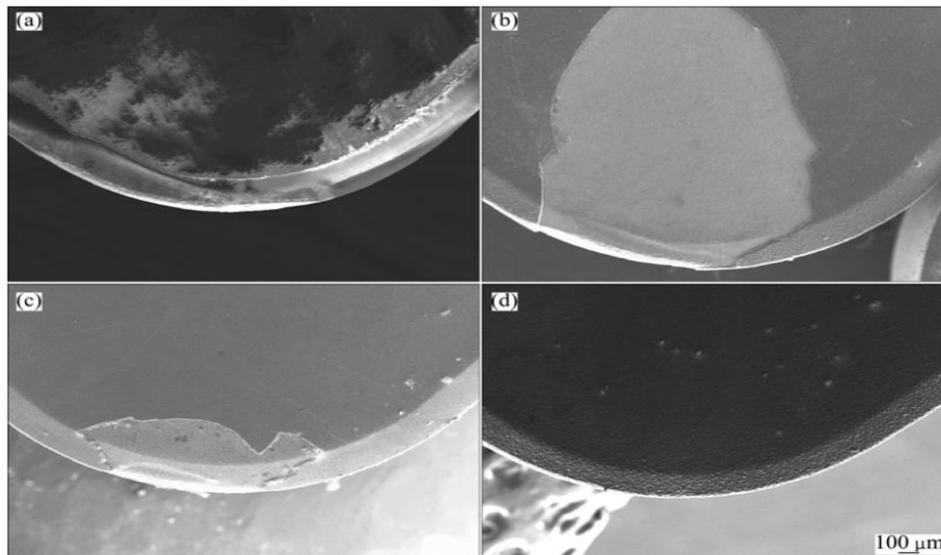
FE-SEM images of surface morphology of inserts after turning Al-Si alloys: (a) Uncoated insert; (b) NCD coated insert; (c) MCD coated inserts; (d) MCD/NCD coated inserts
